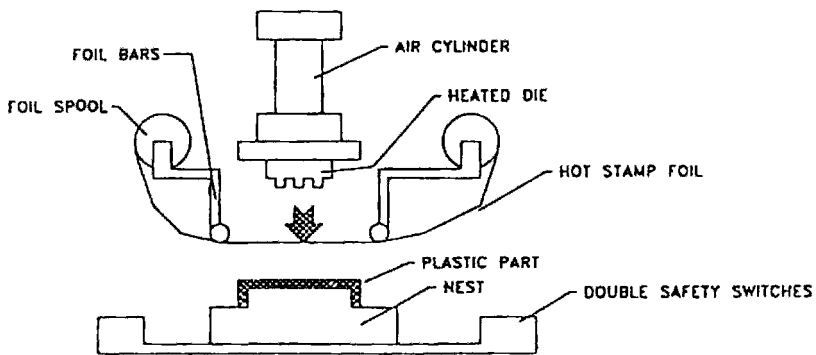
Hot stamping machine for flat plastics parts. (From Ref. 15.)
